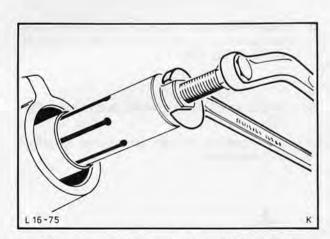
Extract extension housing bush with Special Tool No. 16-011/16-025
